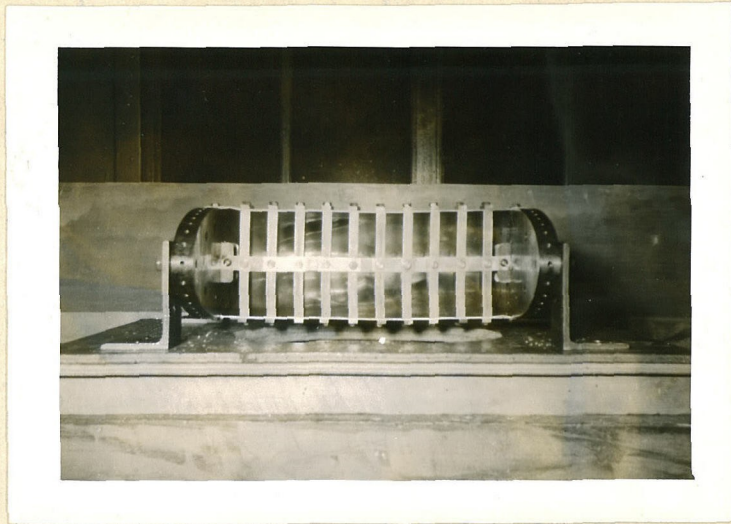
Exposed Section of Test Specimen Showing Details of Construction
